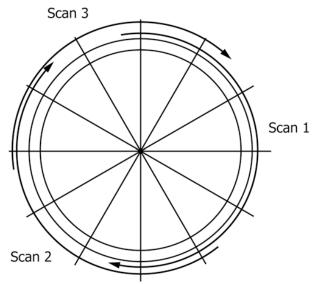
Scanning Pattern for a Circumferential Weld
